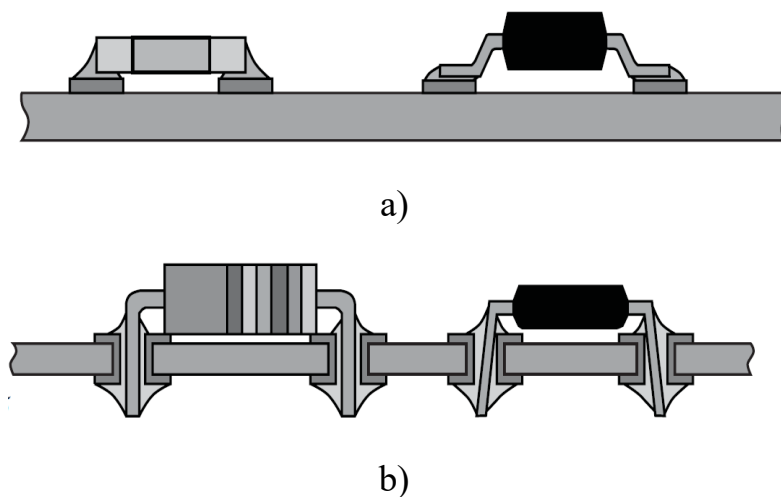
Methods of installing elements on printed circuit boards: a – surface mounting (SMT mounting); b - installation of terminals in holes
